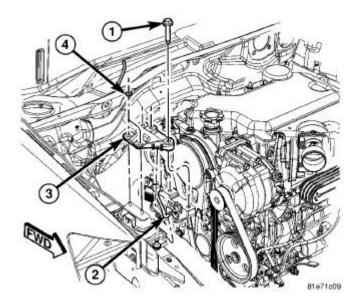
Upper Front Engine Mount Courtesy of CHRYSLER LLC
